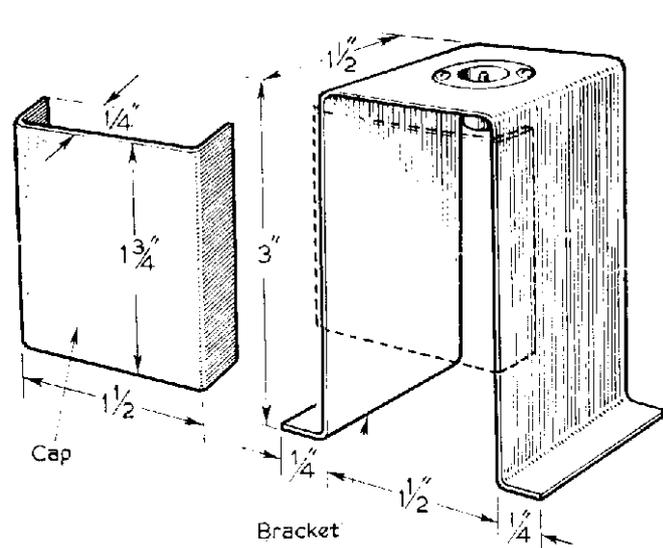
The mounting bracket for the coaxial socket in the r.f. stage.
